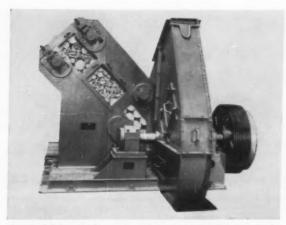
Disk machine for cutting wood shavings made by Heinrich Wigger & Co. The magazine takes blocks 13 in. long. It is inclined at 45 deg to the cutting disk which is provided with four knives. The blocks are clamped between two chains that push the contents against the rotating disk. Continuous feed. Scoring knives determine the shaving length. Power: starting, or with dull knives, 50 kw; operating with sharp knives, 22–23 kw.
